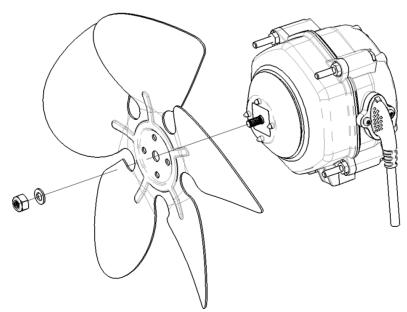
Fan Assembly (external thread shaft) Torque Setting: 3.0 – 3.2N.m
